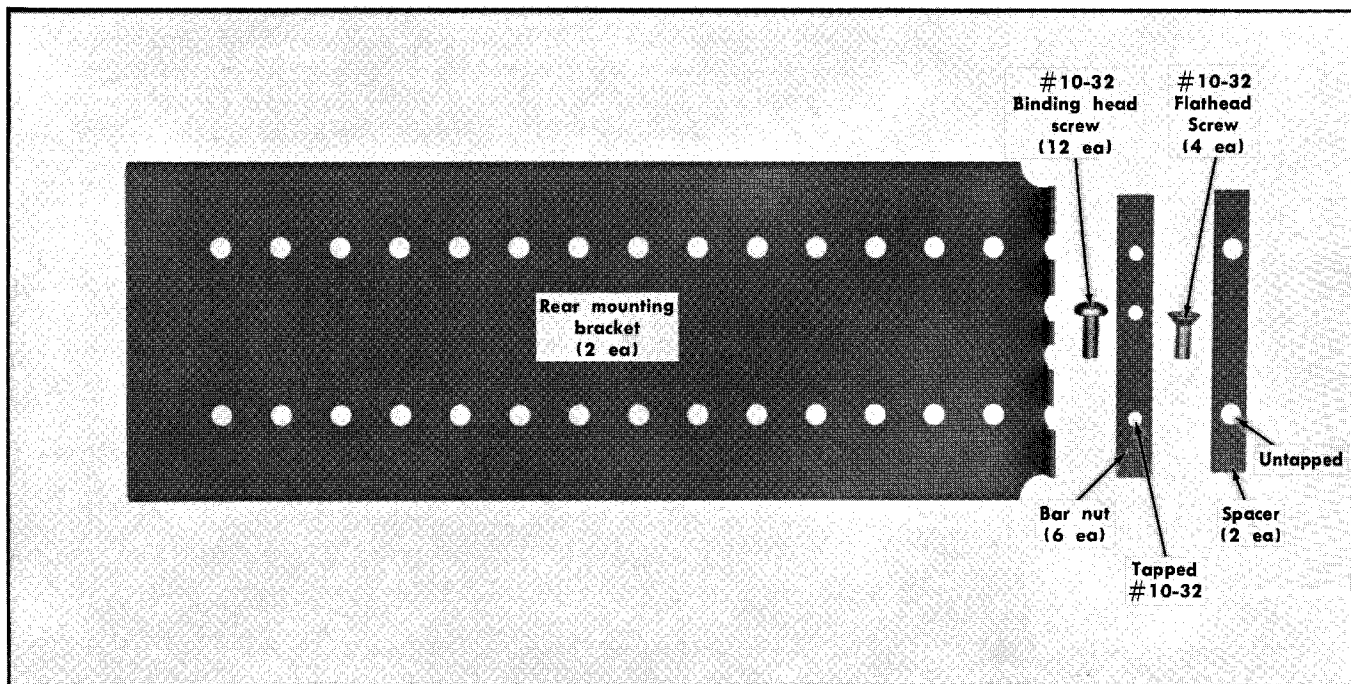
Small hardware components provided for attaching the stationary sections of the slideout tracks to the cabinet-rack rails.
